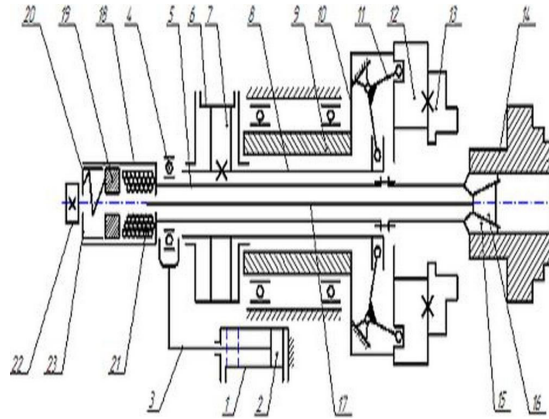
High-speed clamping mechanism with automatic workpiece manipulation
